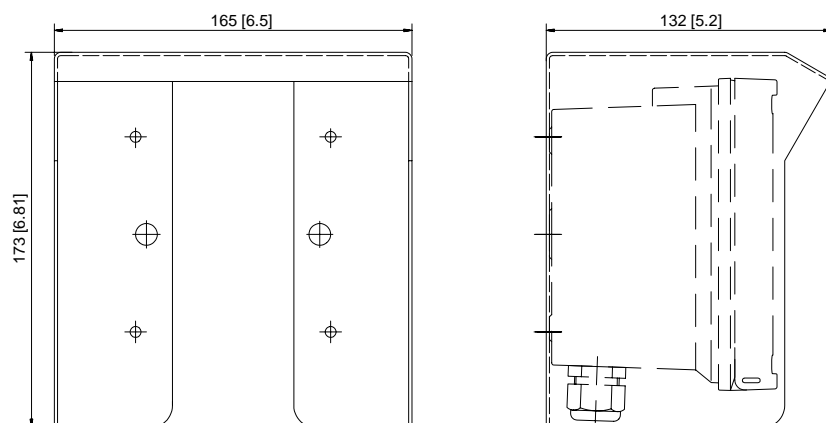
Protective hood (Order No. 1008709) for wall and pipe mounting
